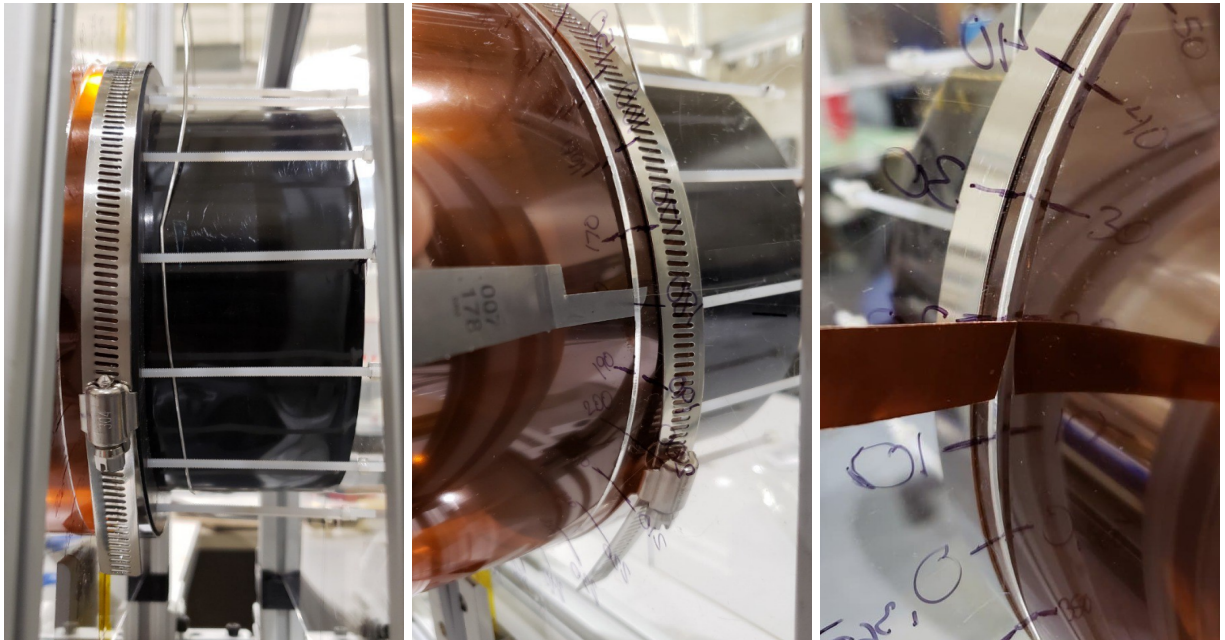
Left: Metal strap with worm gear used as a new closing mechanism for the ending assembly. Center: Modified feeler gauge used for measuring very narrow gaps. Right: Copper tab marked off for measuring larger gaps where use of the feeler gauges was not practical.
